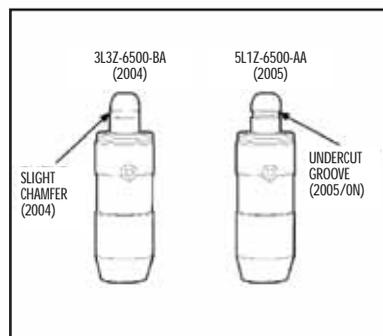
A groove in the lash adjuster on 2004-'05 Ford 5.4L engines will identify 2004 or 2005 components.
